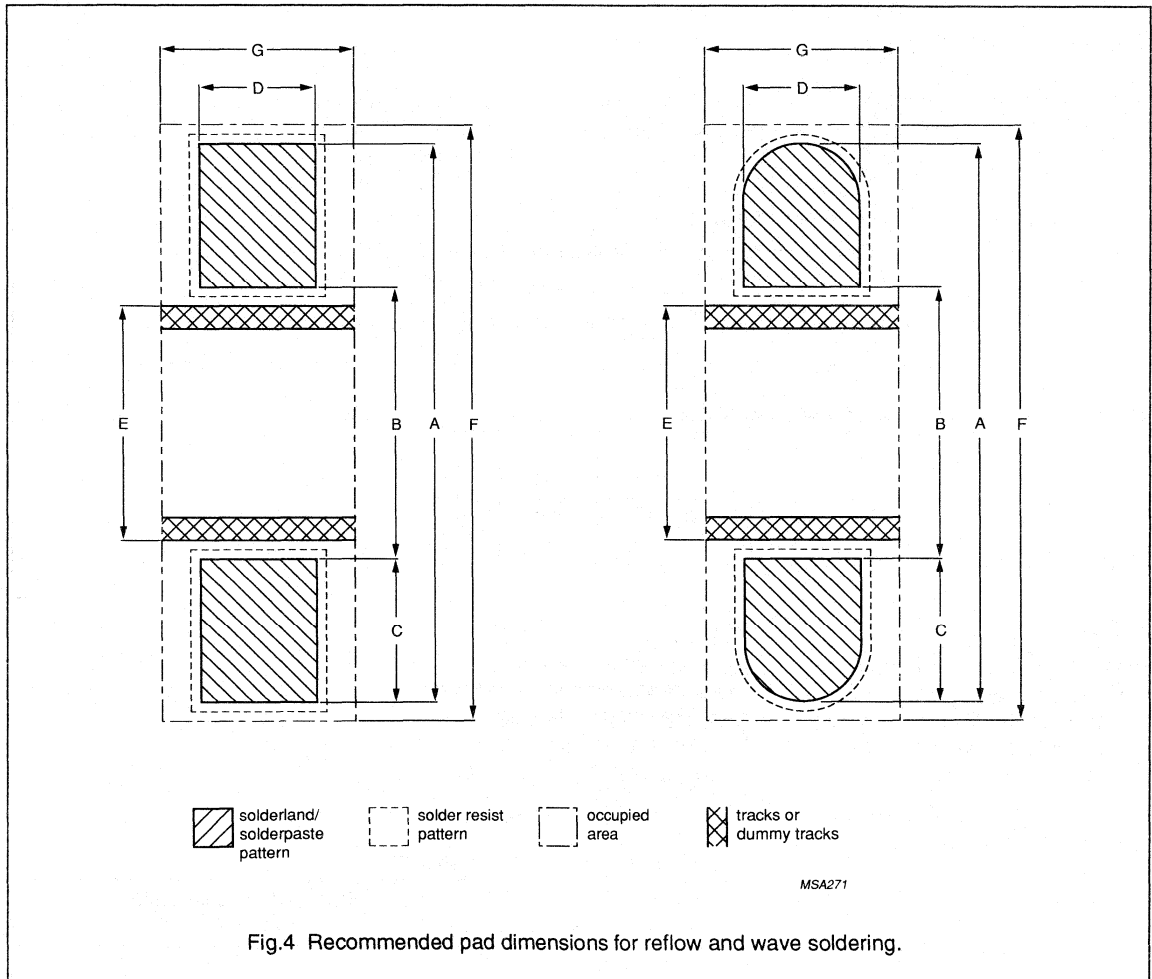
Recommended pad dimensions for reflow and wave soldering.
